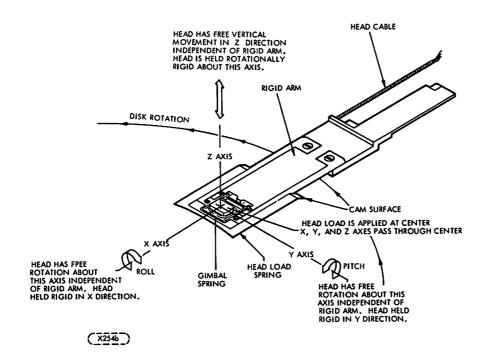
HEAD/ARM ASSEMBLY MOTION
